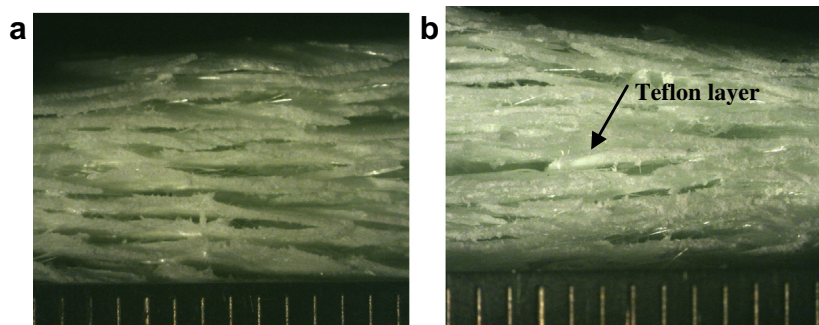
Failure of (a) a S specimen and (b) T2 specimen after static test.
